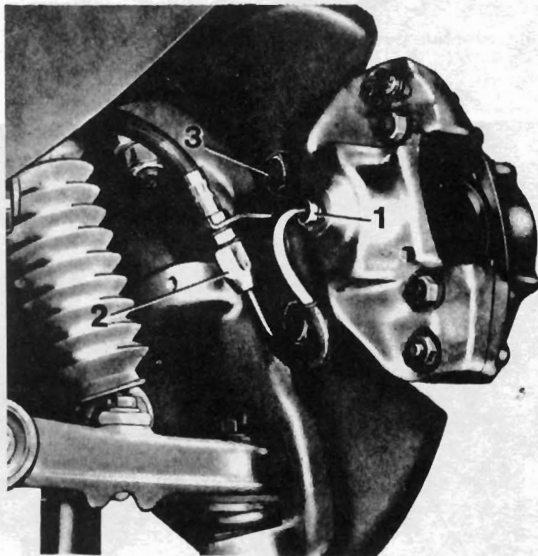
Front caliper pipeline connection (Sec 5)
